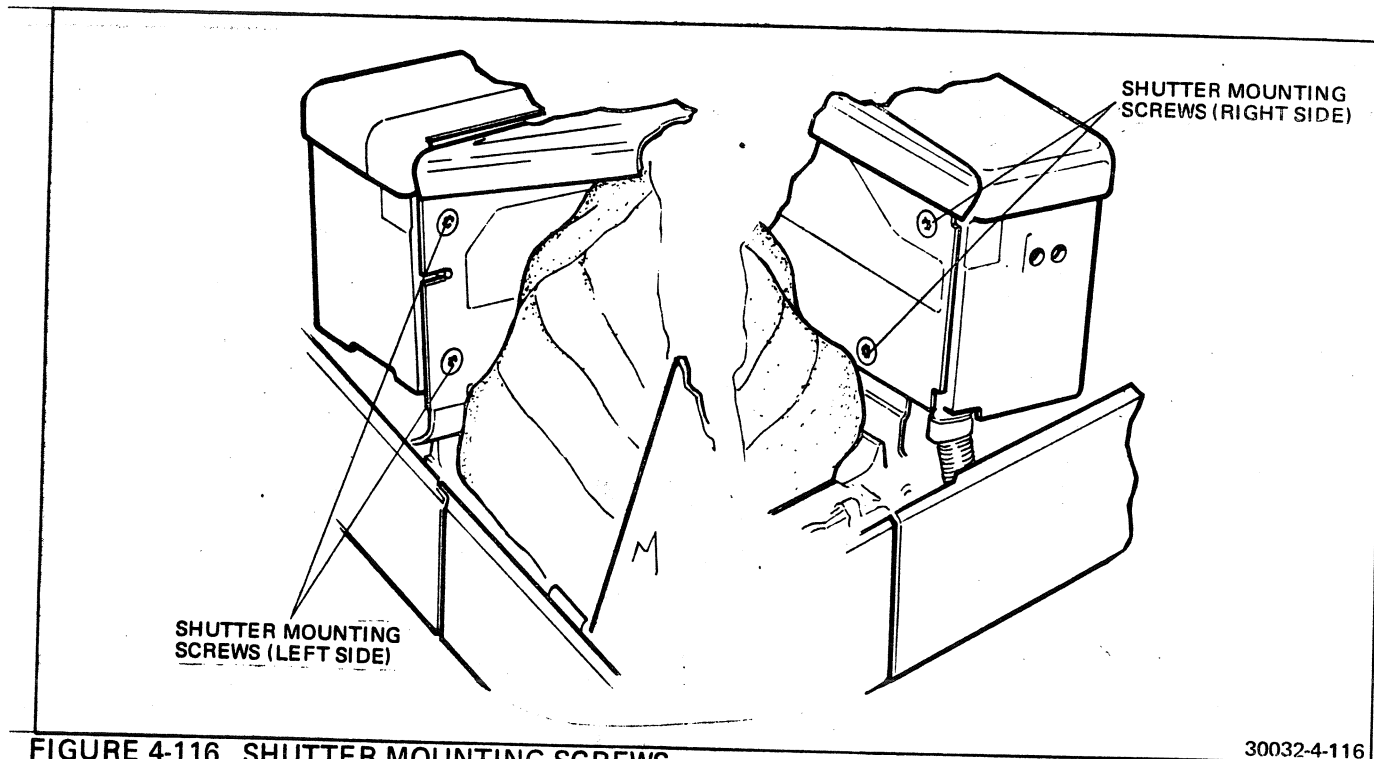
SHUTTER MOUNTING SCREWS
